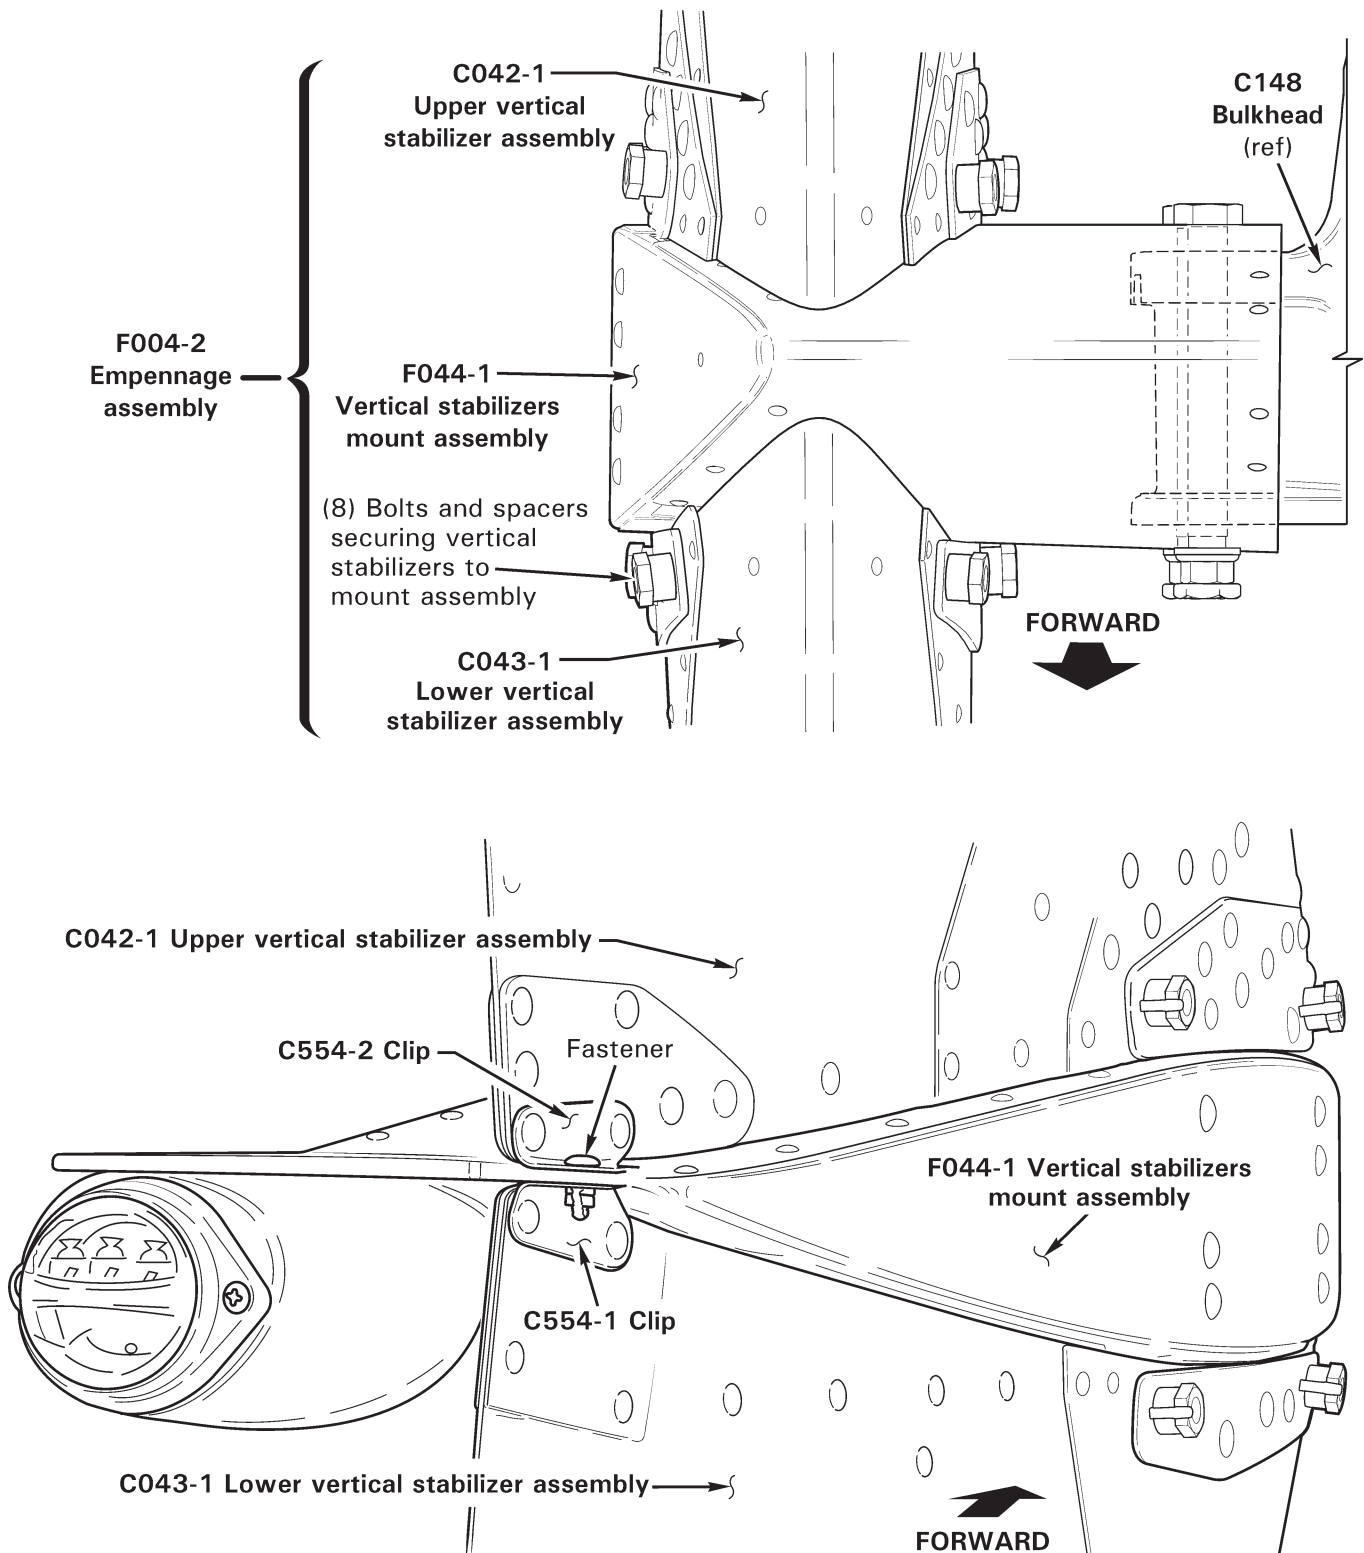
F004-2 EMPENNAGE ASSEMBLY
